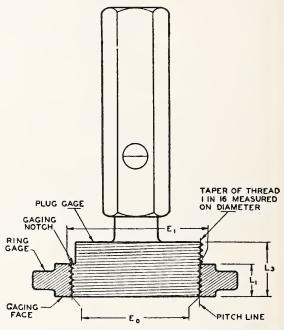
Standard taper pipe thread plug and ring gages.
